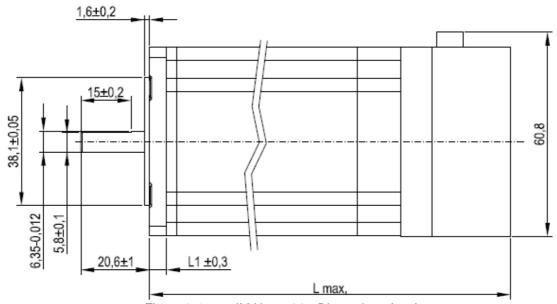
stepIM Nema 23 - Dimensions (mm)
